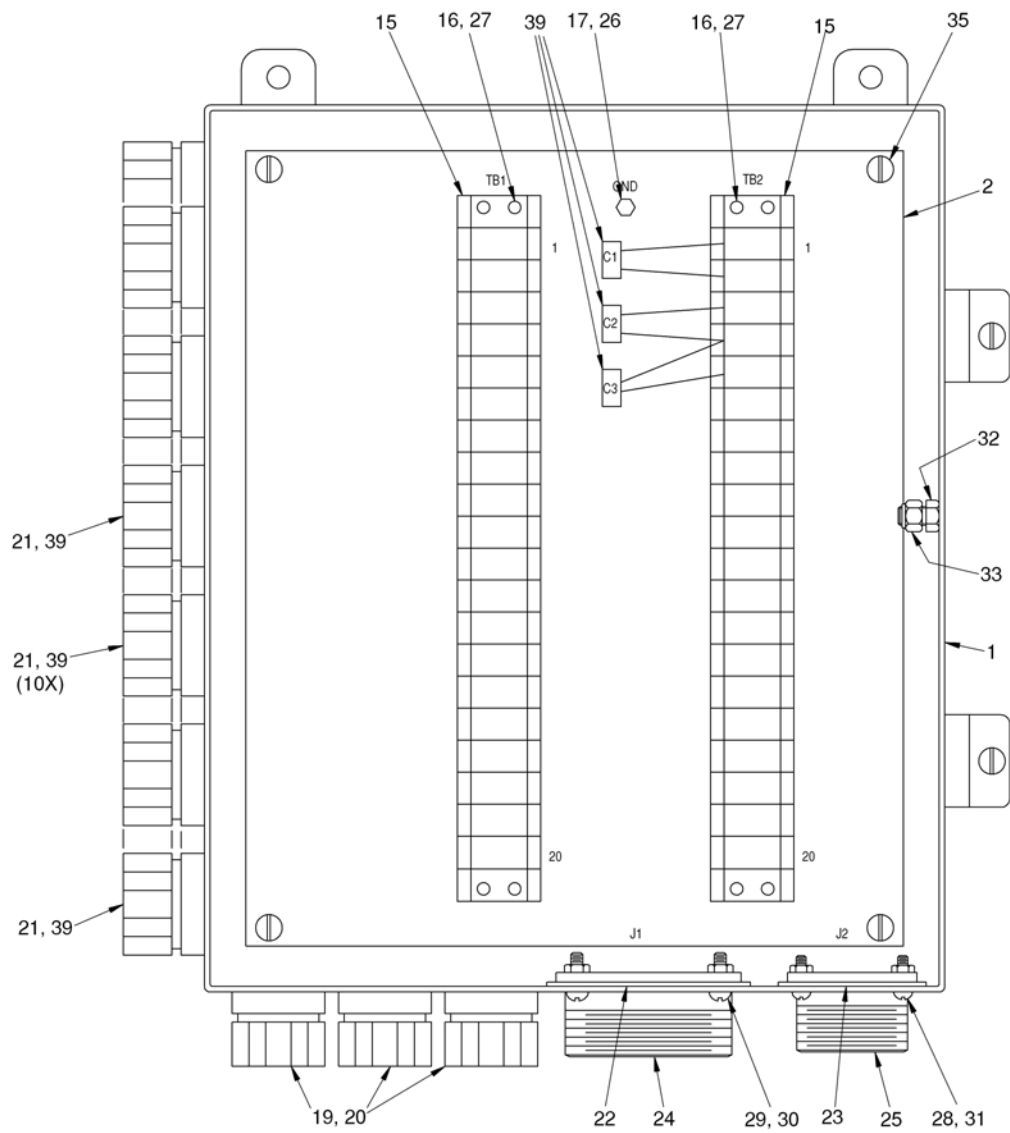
K (Sheet 2 of 2). CMU Front Electrical Enclosure assembly
